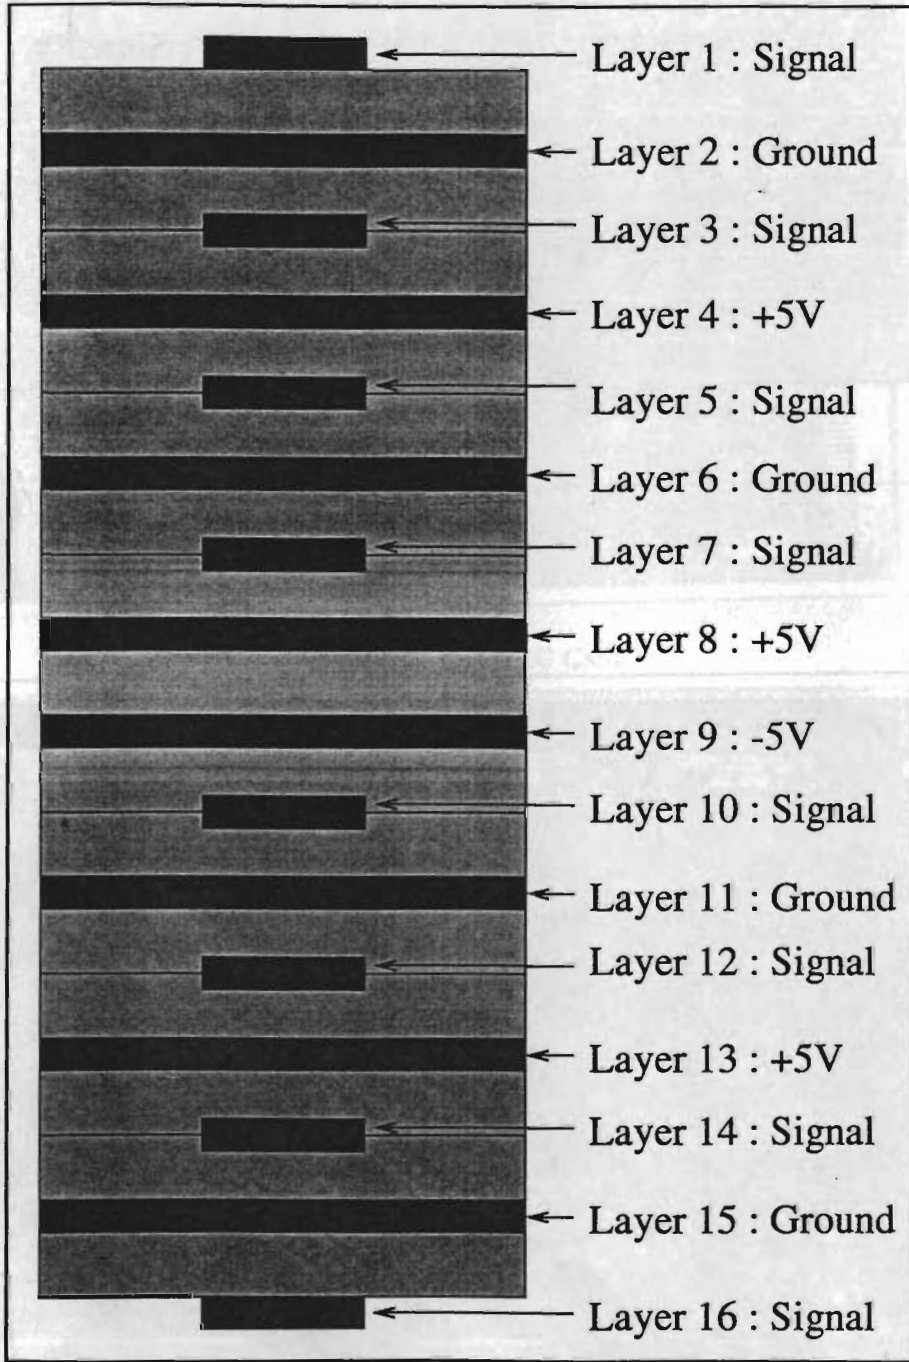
The MAC Backpanel System Main Board : Layer Assignments
